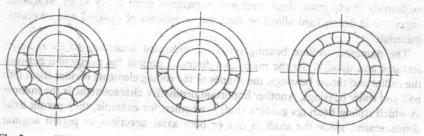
c Filling balls into a deep groove ball bearing without filling slot
